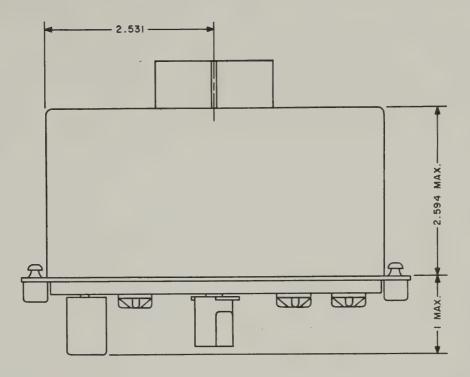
Outline and Mounting Dimensions, Power Supply 416W–1
